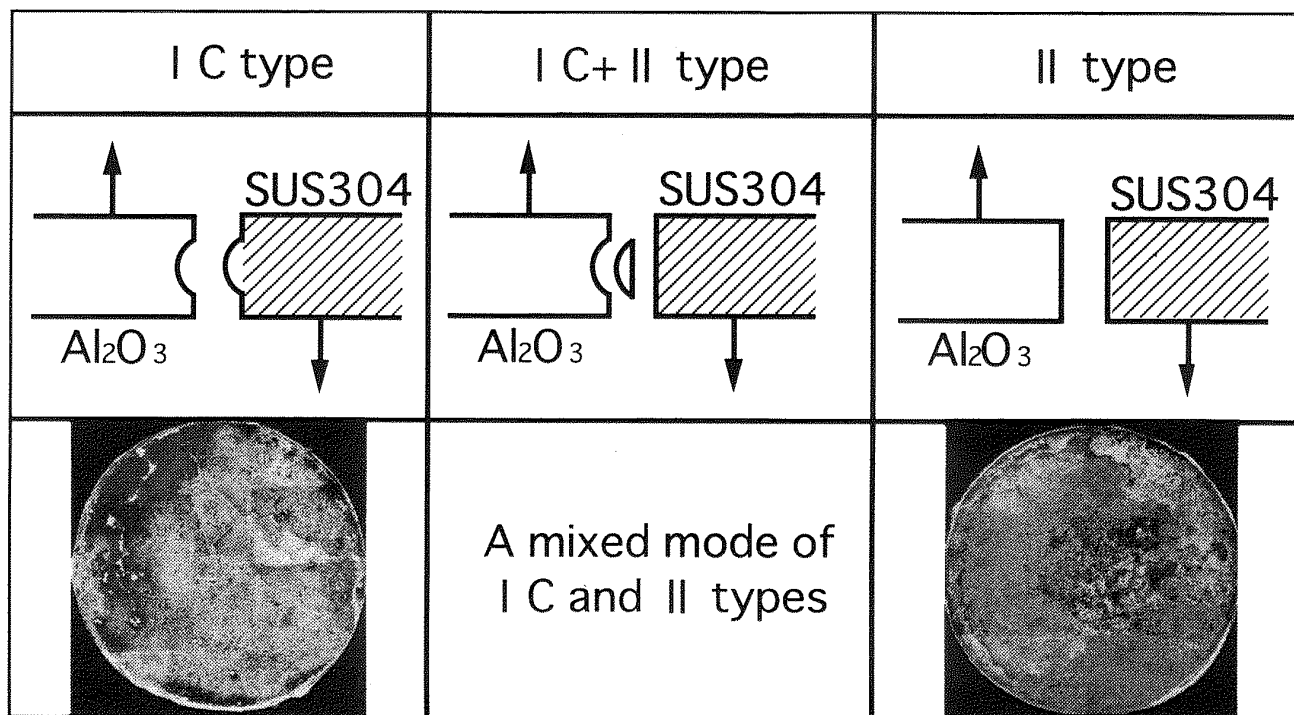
Schematic illustrations and fractographs of fracture pattern.
